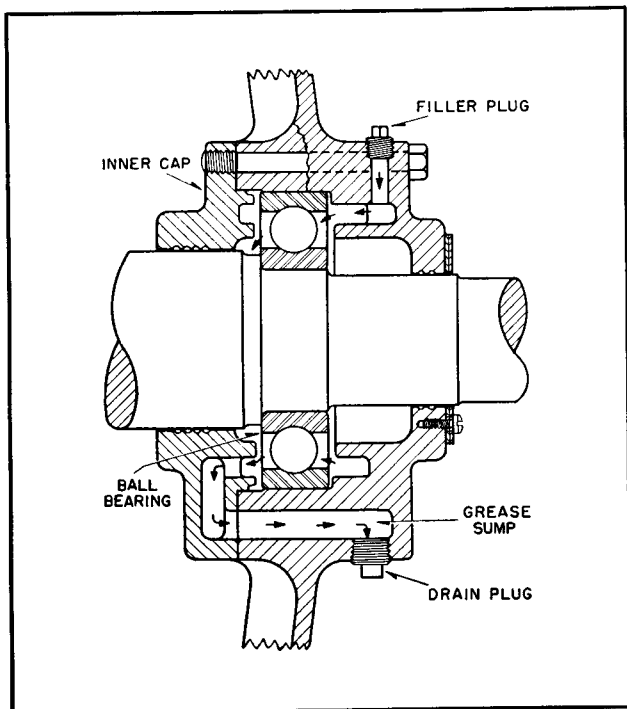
Typical Ball Bearing (Grease Lubricated)
